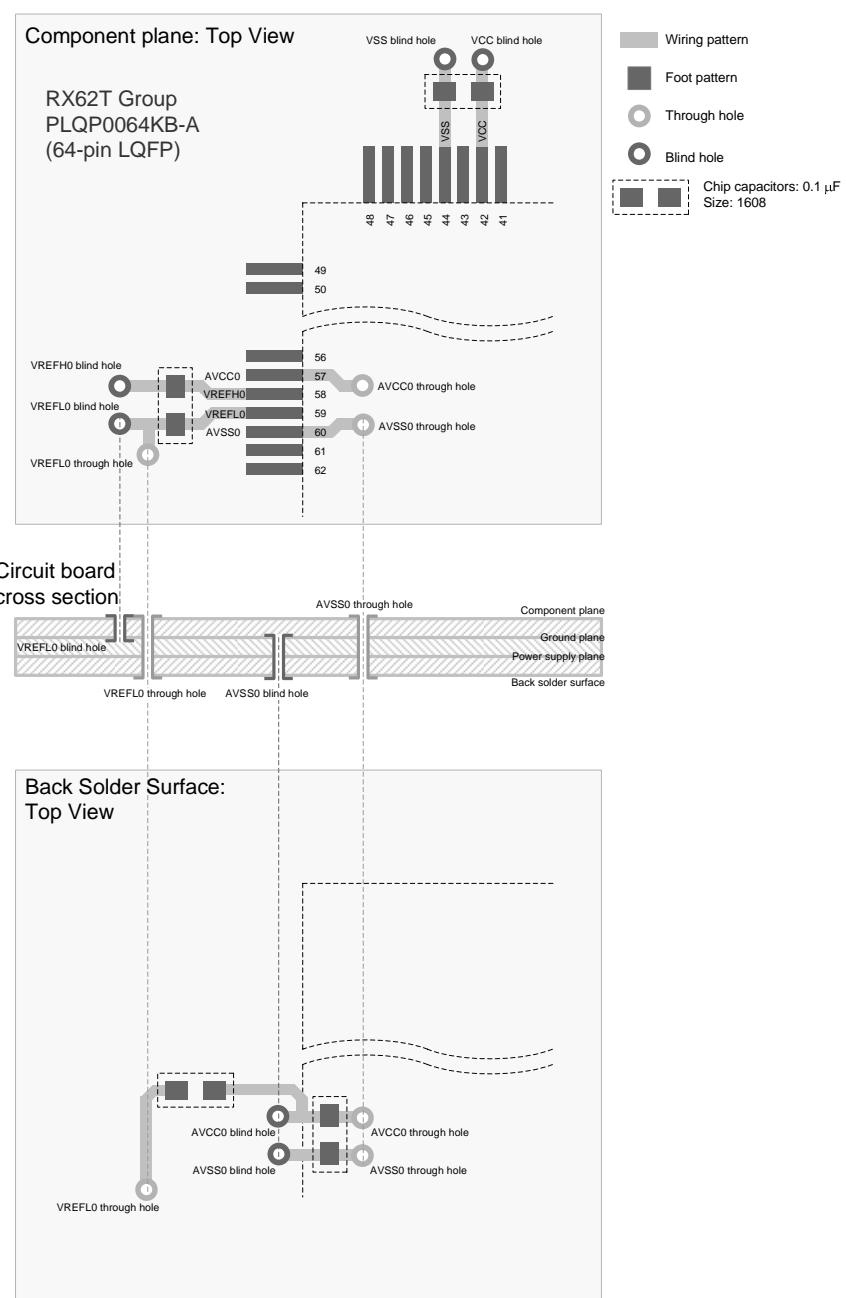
RX62T 64-Pin LQFP Package Power Supply Pin Capacitor Layout Example
